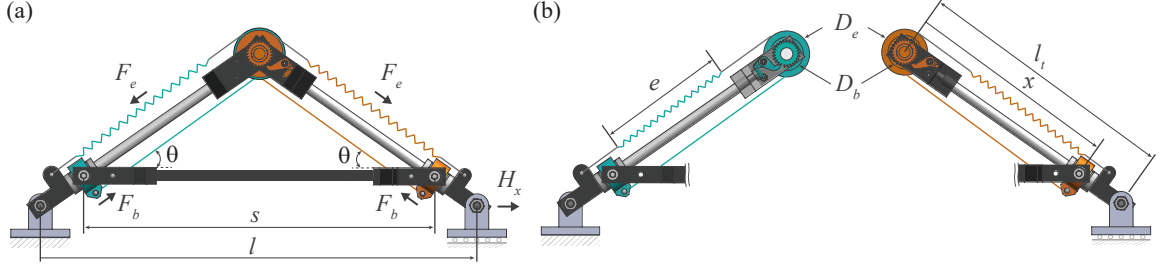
Force and kinematic analysis using the CAD model of the spring leg prototype. (a) With the compression spring locked, the floating spring assembly acts as a rigid link of length s . The force from the extension springs, F_e , creates a force F_b to retract the spring endpoint bearings towards the knee, which results in a force at the hip, H_x . (b) The extension springs, of length e , are coupled to the spring endpoint bearings by pulleys with two drums. The cable connected to the extension spring wraps around a drum of diameter D_e , while the cable connected to the spring endpoint bearing wraps around a drum of diameter D_b .
